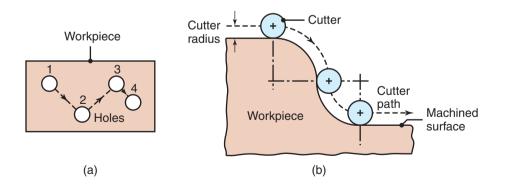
Movement of tools in numerical-control machining. (a) Point-to-point, in which the drill bit drills a hole at position 1, is retracted and moved to position 2, and so on. (b) Continuous path by a milling cutter. Note that the cutter path is compensated for by the cutter radius; the path also can be compensated for cutter wear.
